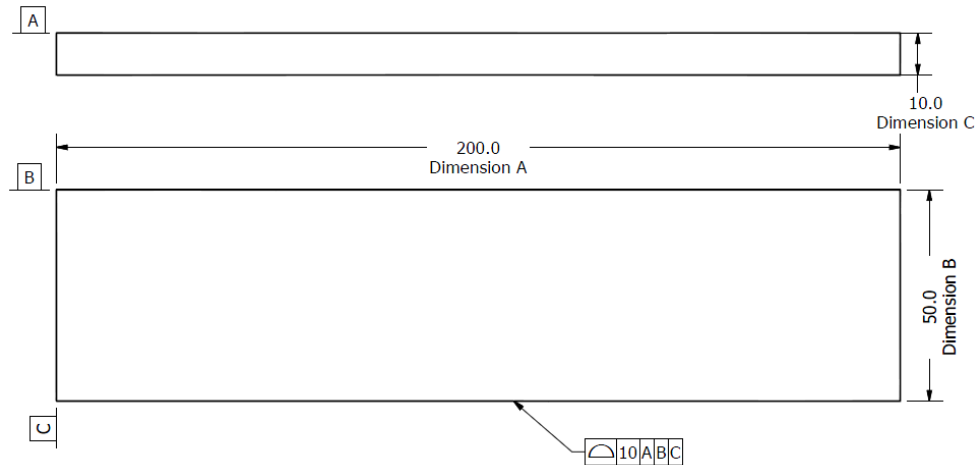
Drawing of Block 1 with datums and a profile geometric tolerance.
